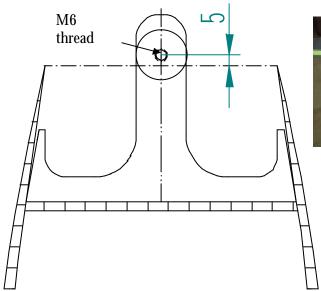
Scribing the threaded hole in the flap bearing support
